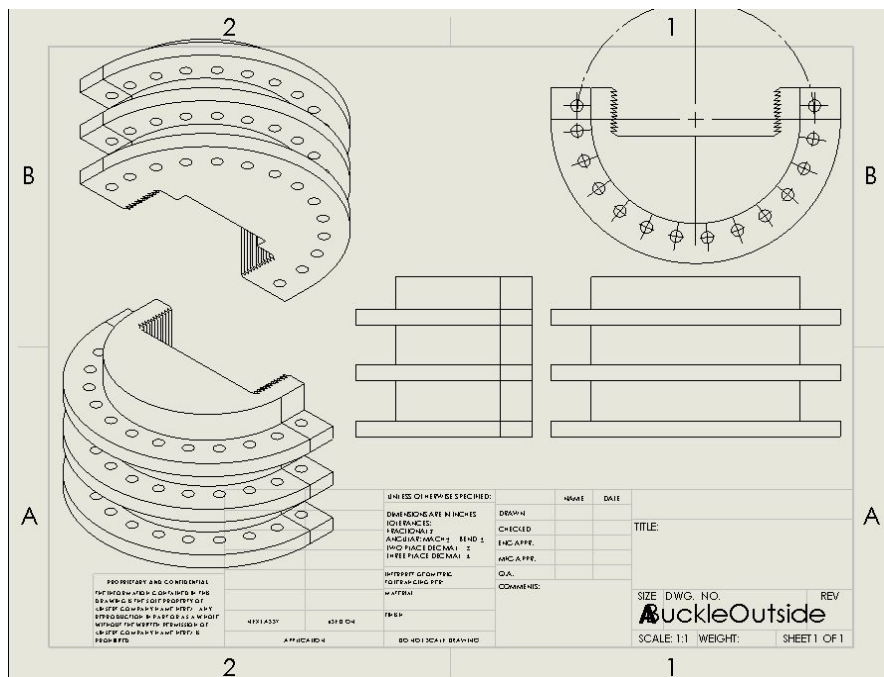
Solidworks drawing of the outer half of the buckle design that surrounds the inner piece and the magnet.
